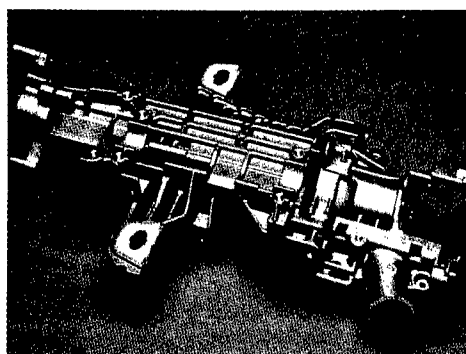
Steering column assembly composed of three magnesium diecastings (4).
